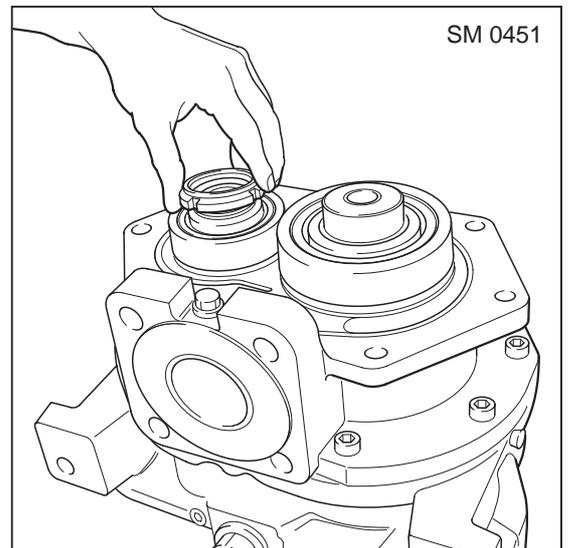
Fitting Guide Bush for Locknut Spanner on Female Shaft
